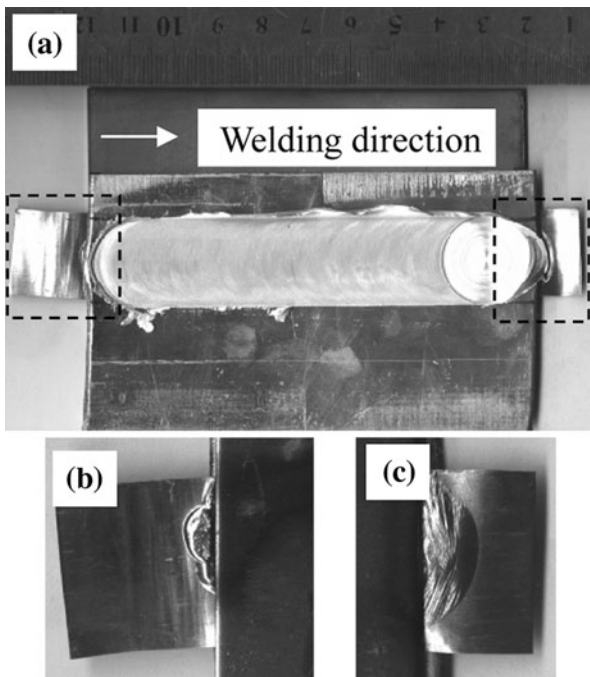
Appearance of the (a) typical friction stir brazed joint and extruded Zn (b) at the start and (c) at the end of the weld bead.
